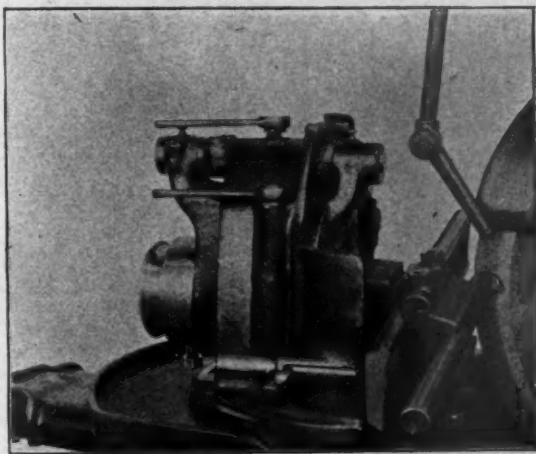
SUPPLEMENTAL CHUCK AS USED FOR THE OUTSIDE FACE OF AN INSIDE THREAD TOOL.
